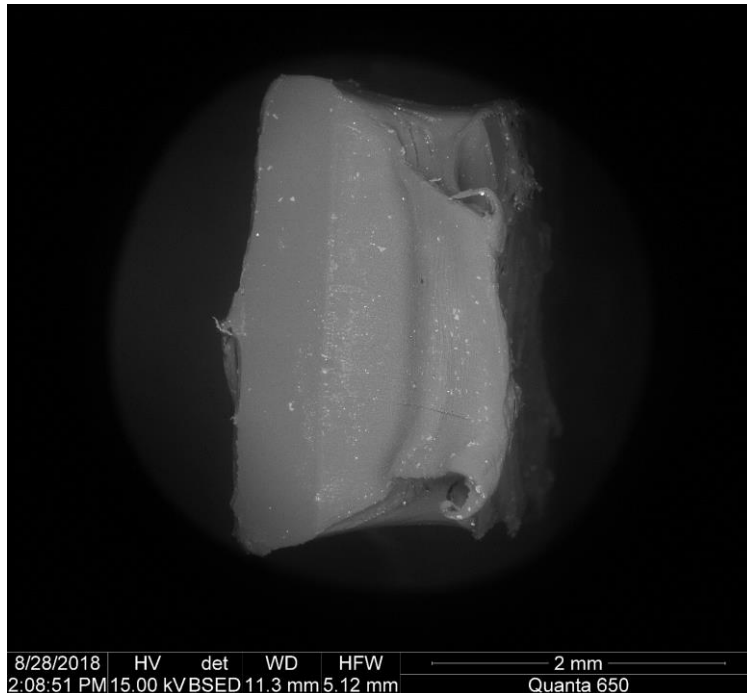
Fracture surface of a NCTL specimen of unaged textured specimen; SCR = 150 hours.
